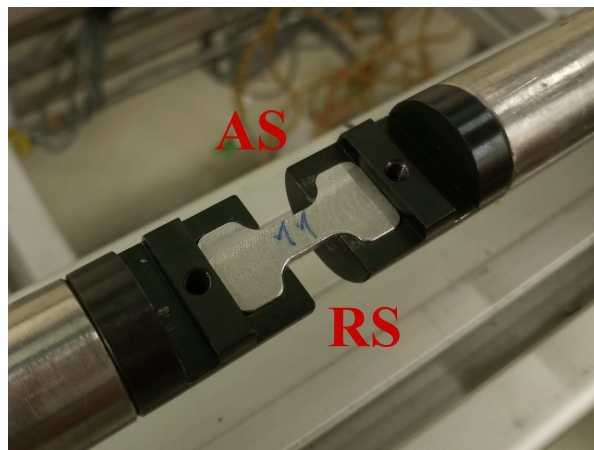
Butt joint specimen with axial welding placement on the grips, advancing-retreating side
